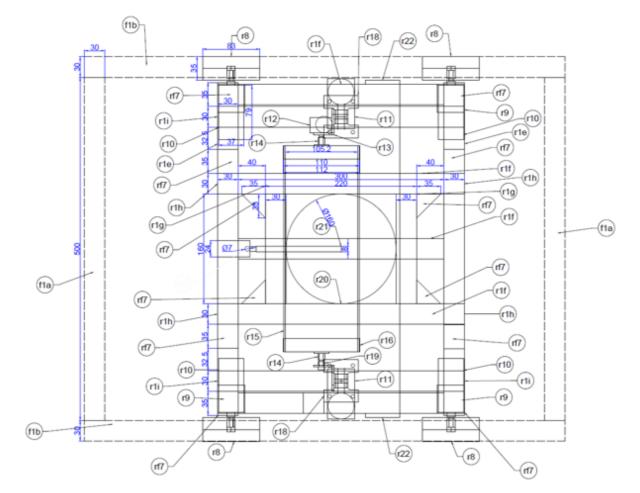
Cleaning Robot Orthographic Drawing – Full View
